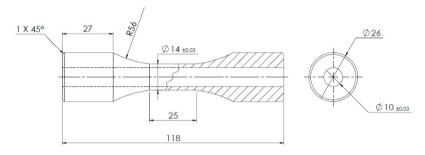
Geometry of the hollow cylinder specimen. All dimensions are in mm.
